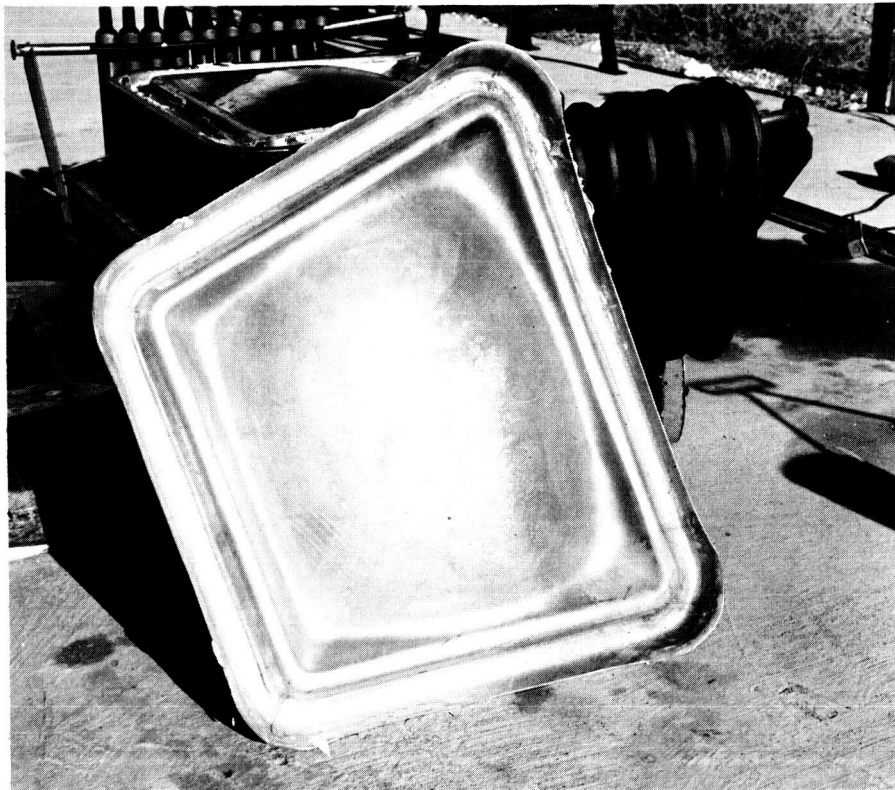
Typical 0.125-in.-Thick 2014-0 Aluminum Part Explosively Formed on Male Die
